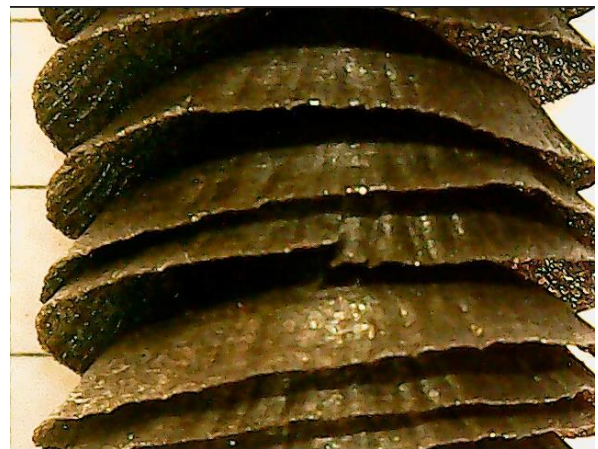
Cast Iron – Chips –O/W - Drilling Microscopic.
